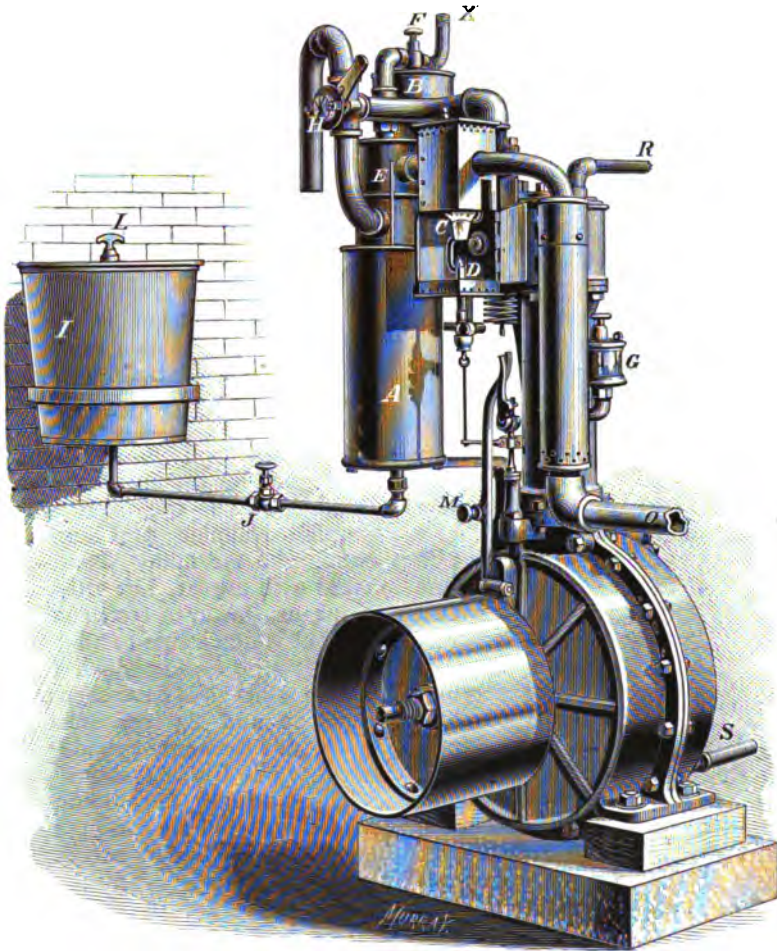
SINGLE CYLINDER MOTOR, BUILT BY THE DAIMLER MOTOR COMPANY, NEW YORK.
